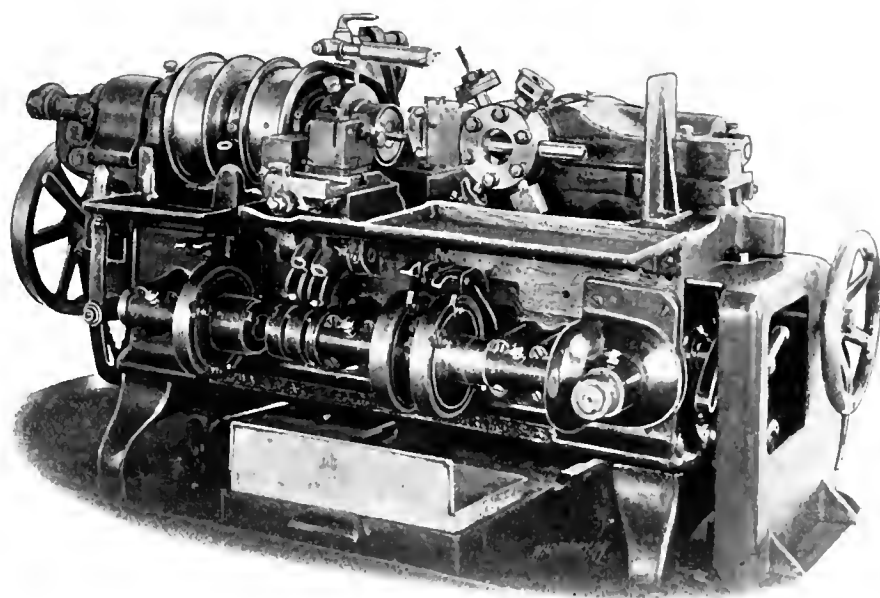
An Automatic Screw Machine, arranged for Gear Cutting.
